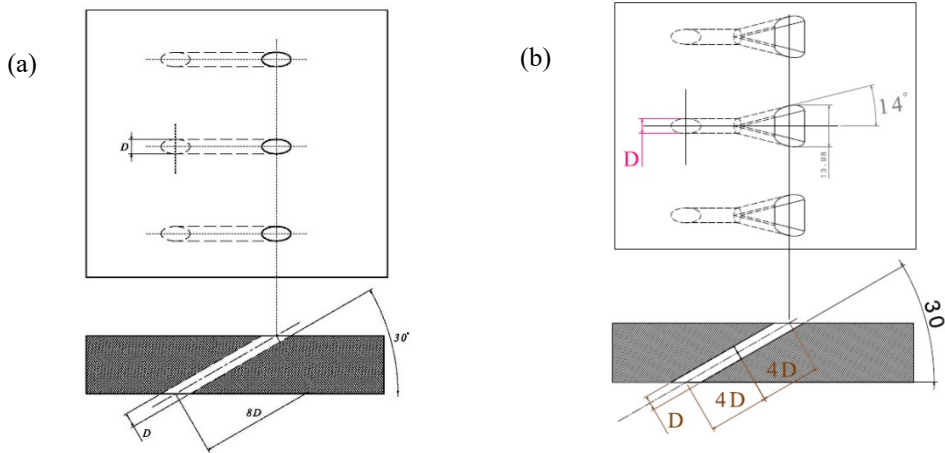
Schematic of flat plate (a) with cylindrical holes; (b) with fan-shaped holes.
